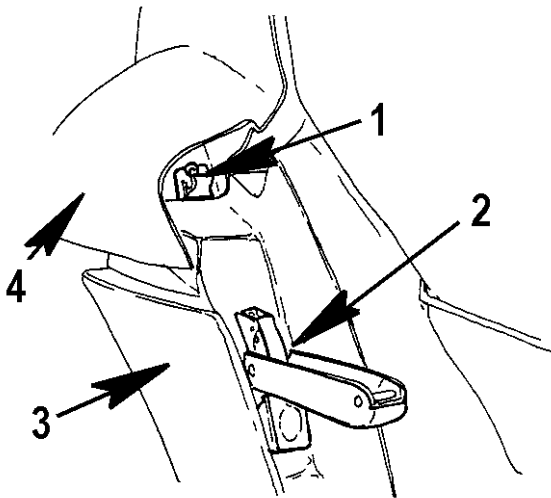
Hood Latching Mechanism (Driver Side Shown)
